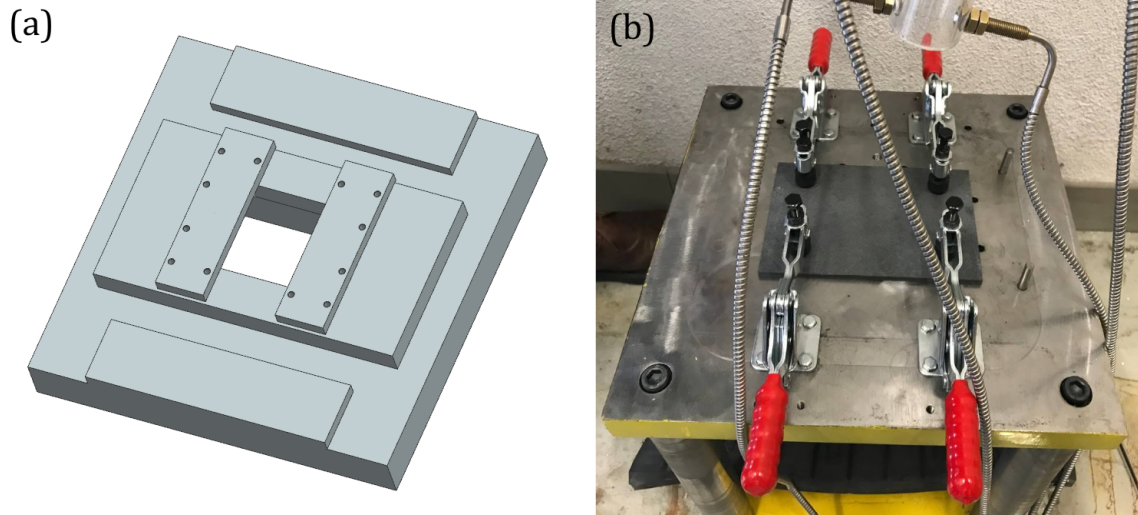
Fixture for low-energy impact test of (a) beam-shaped and (b) plate specimens.
